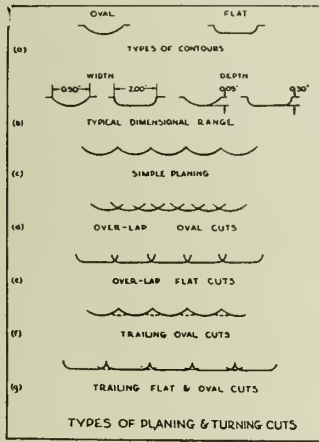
Types of Planing and Turning Cuts Produced by Flame Machining.
